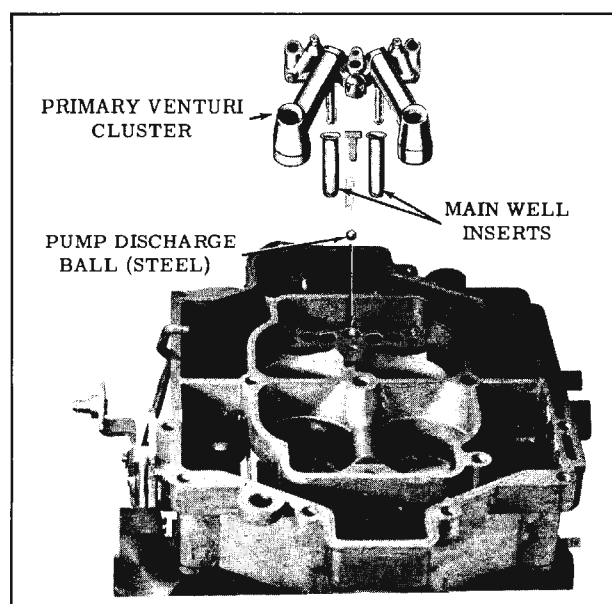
Pump Discharge Spring, Guide and Main Well Inserts
